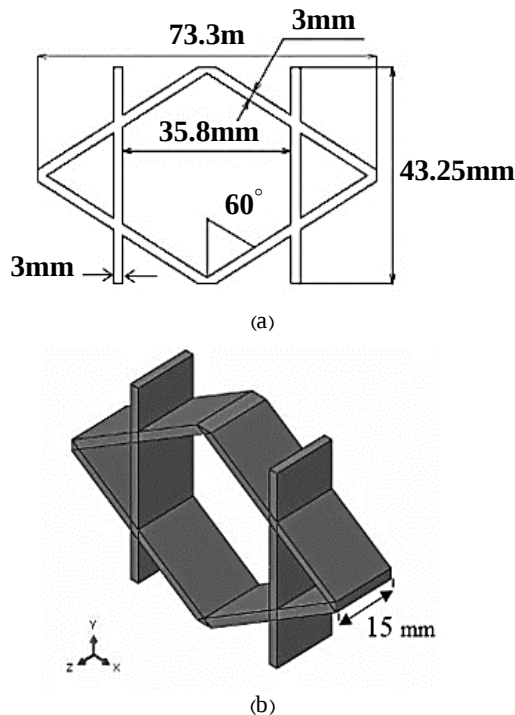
Geometric dimensions of the unit cells of the core panel; a) Front view; b) Isometric view
